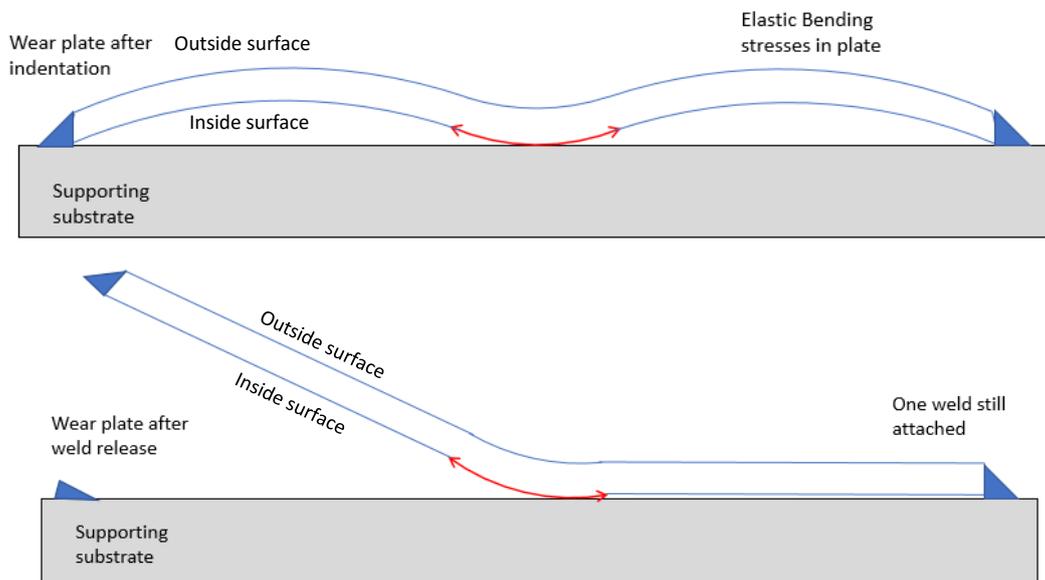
Diagram of a flat plate indented while welded to a stiff supporting substrate; showing the plate while still welded to the substrate (top) and after release of a weld (bottom). See also Figure 13.
